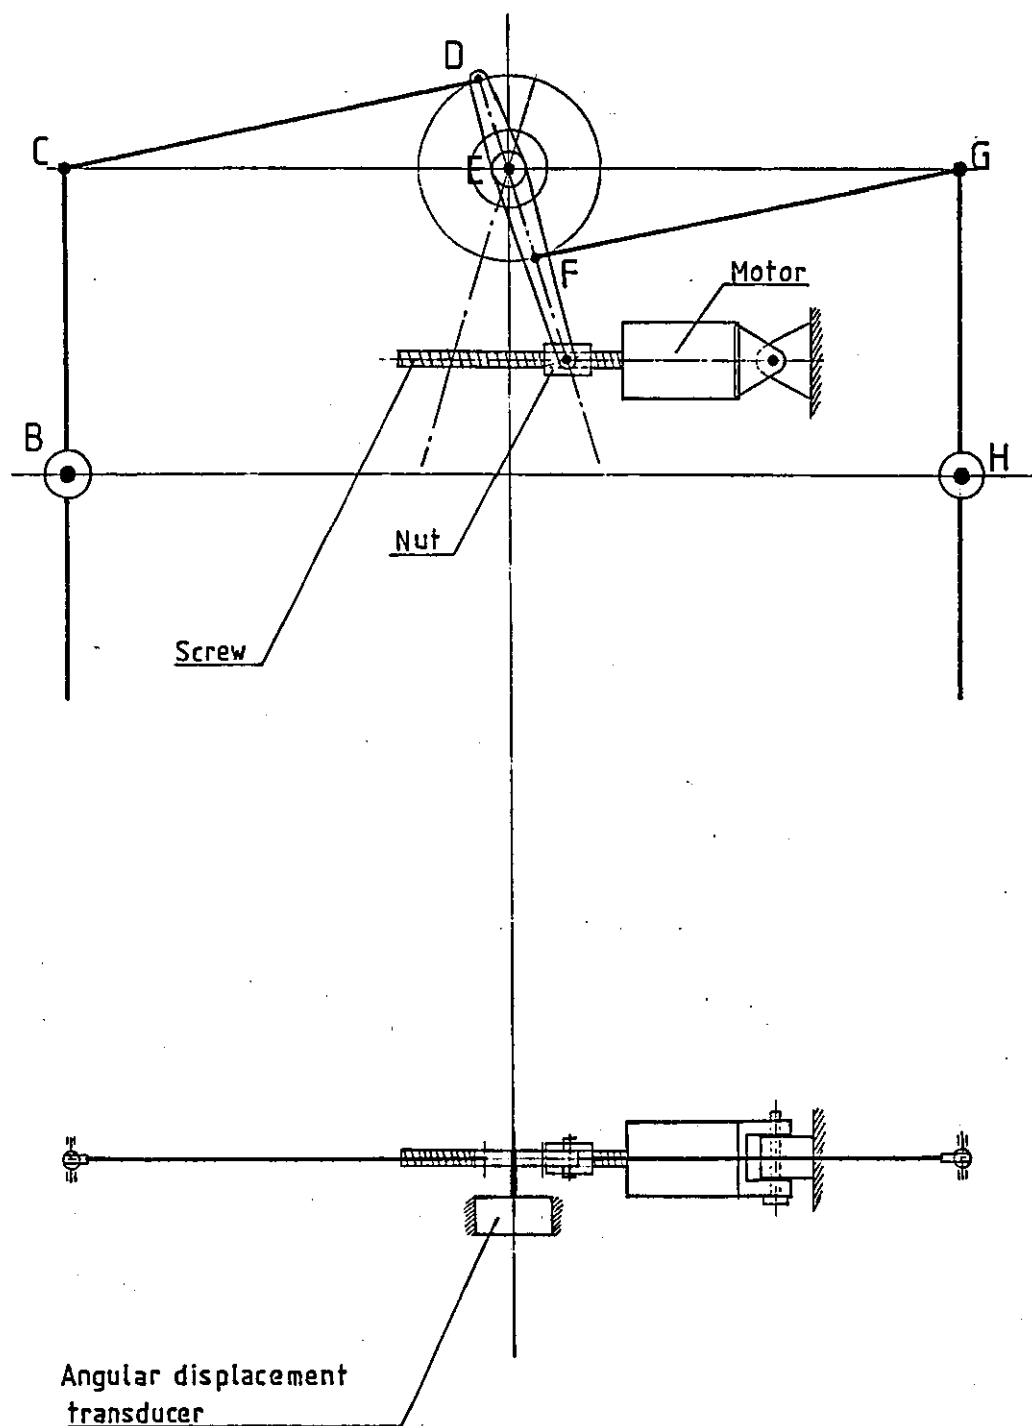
Swinging movement using electric motor with screw and nut.
